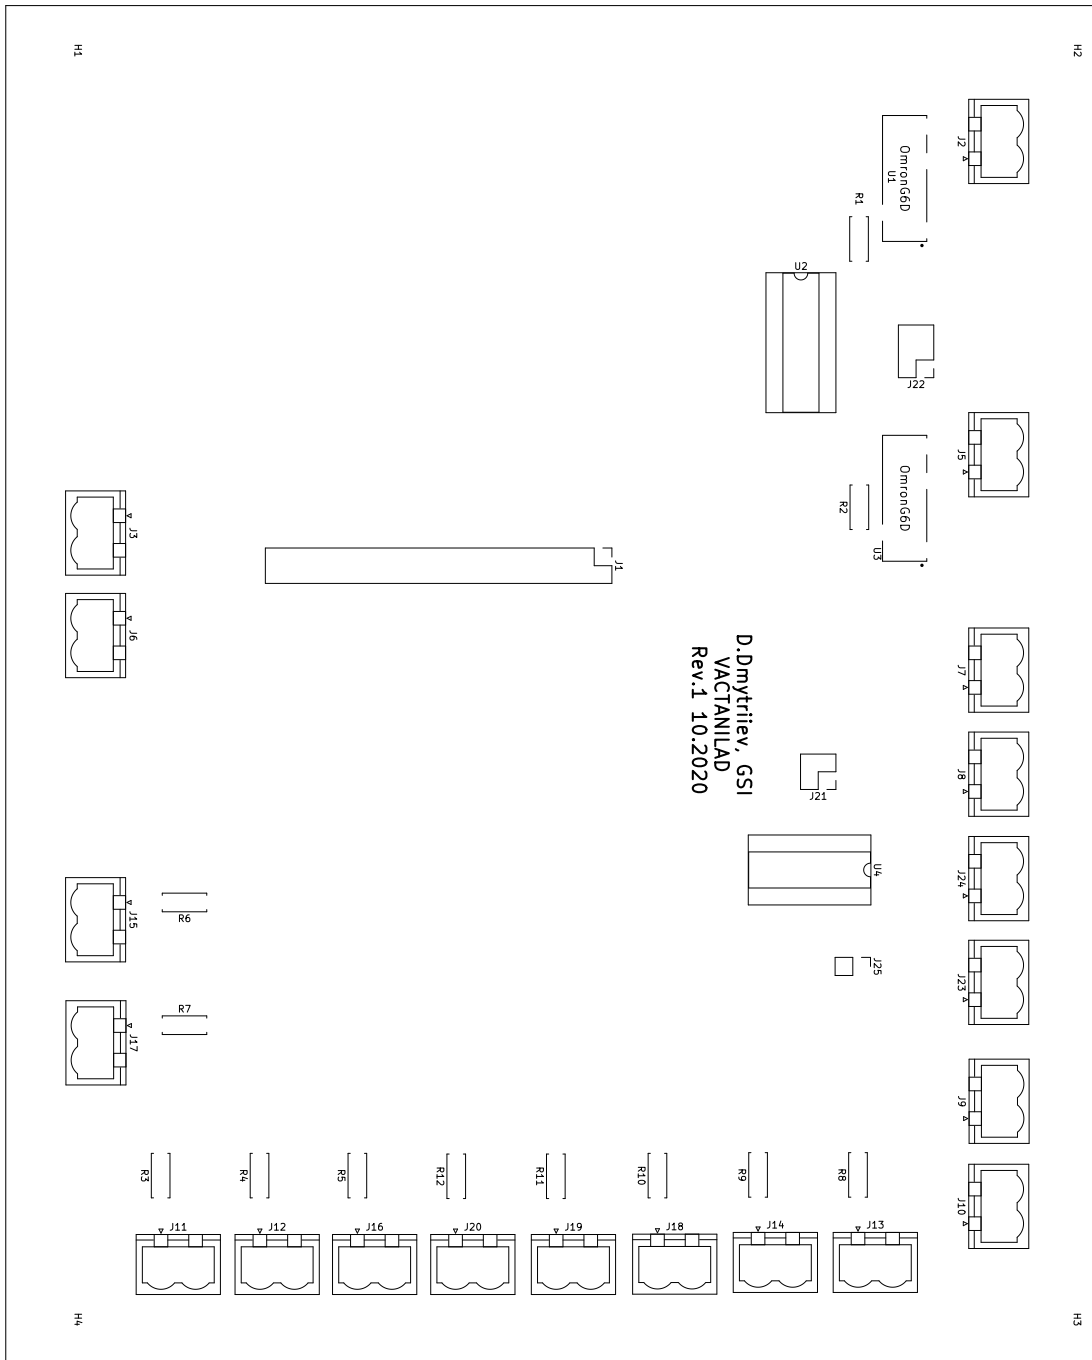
The silk layer shows every footprint for the elements on the top layer of the PCB. Also, it can be used for user-defined writings
